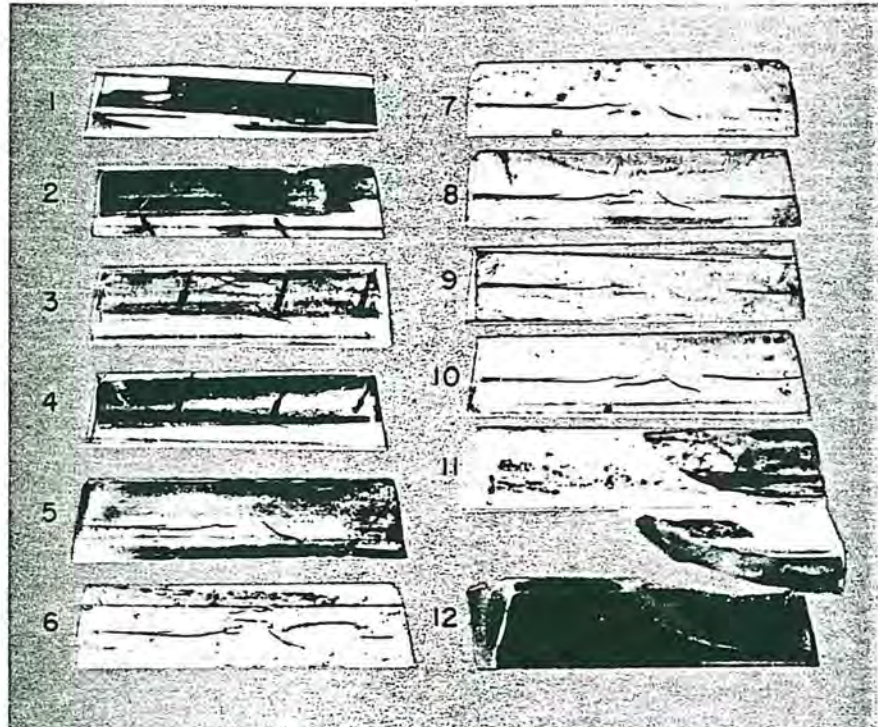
Succession of transfer prints of magnetic particle markings on one cracked gear tooth.
